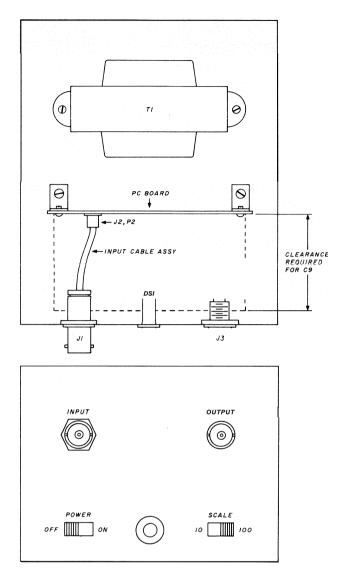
Suggested layout for complete prescaler. Wiring to and from the PC board is shown in fig. 5.
